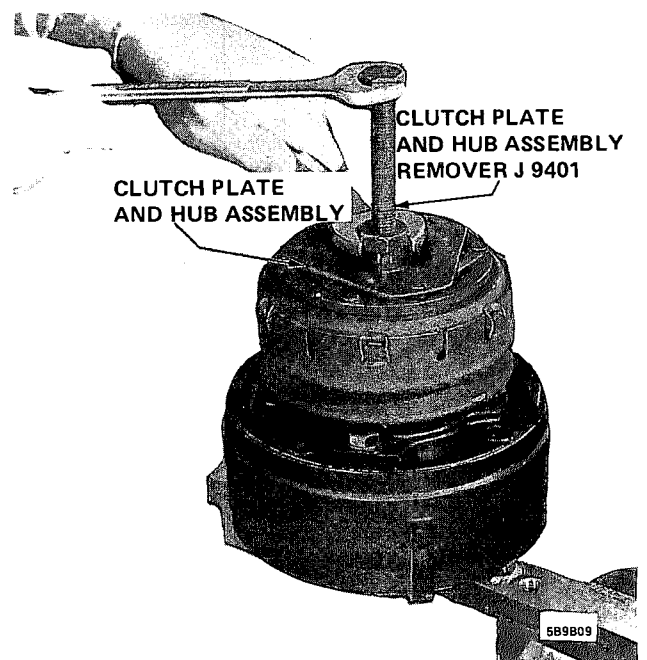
B-32 - Removing Clutch Plate and Hub Assembly - 4 Cylinder Compressor
